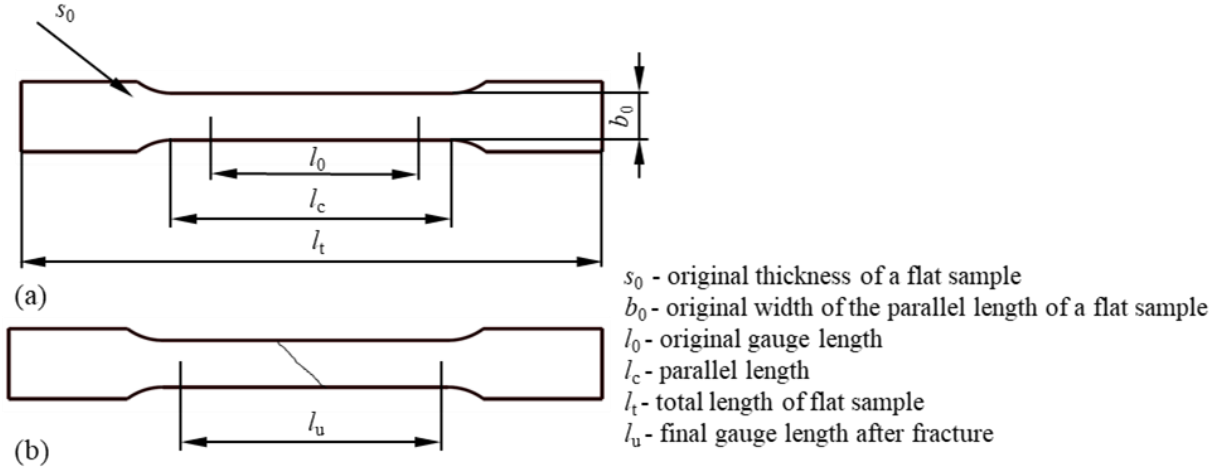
Schematic illustration of a flat sample for uniaxial tensile testing in (a) initial and (b) fractured state
